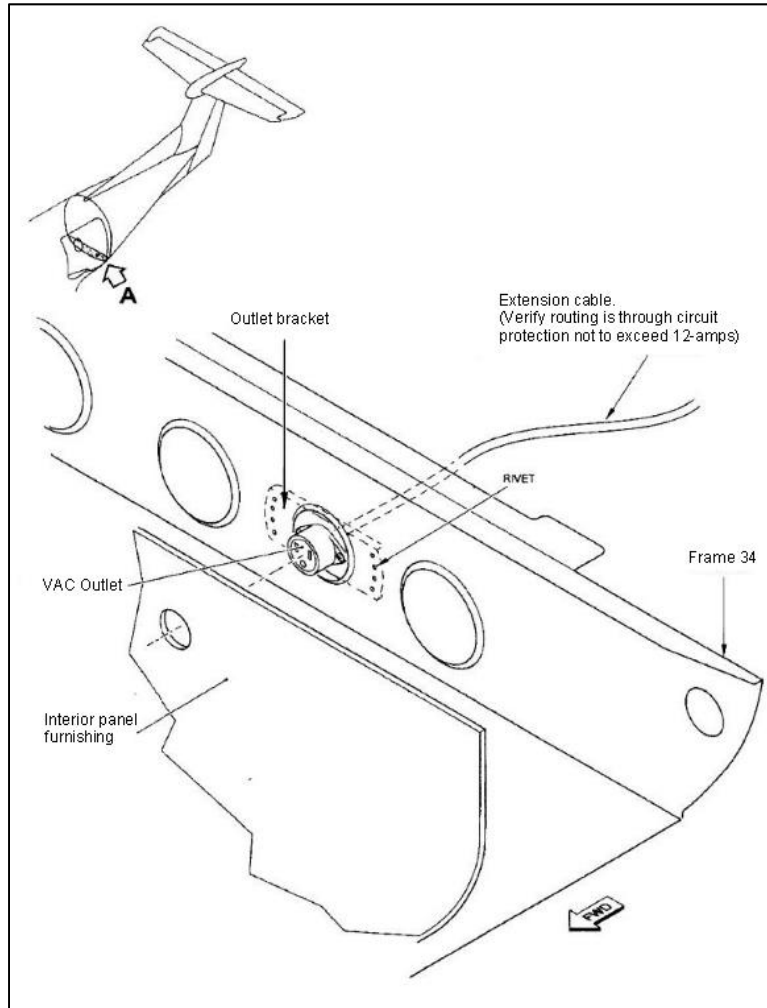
Interior outlet Frame 34, Baggage compartment. Install Tanis AC outlet (P/N: TP02989-115 or TP02988-230) or alternate Pilatus Outlet (P/N: 968.2013.906), and Pilatus outlet bracket/holder (P/N: 553.14.12.591), or field-fabricated equivalent bracket, rivet on rear side of small lower foot-wall structure of Frame 34, second lightening/manufacturing hole from left. Use AN or NAS rivets (NAS1097AD4), assemble wet and seal with PS 870 (PR 1422B-2) or equivalent. Note: when installing Tanis outlet configure bracket center hole accordingly refer to instruction TN02533.
